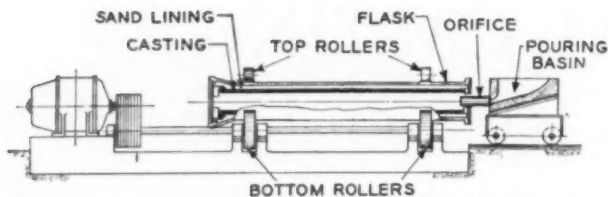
TRUE CENTRIFUGAL MACHINE FOR LONG-TUBE CASTING
